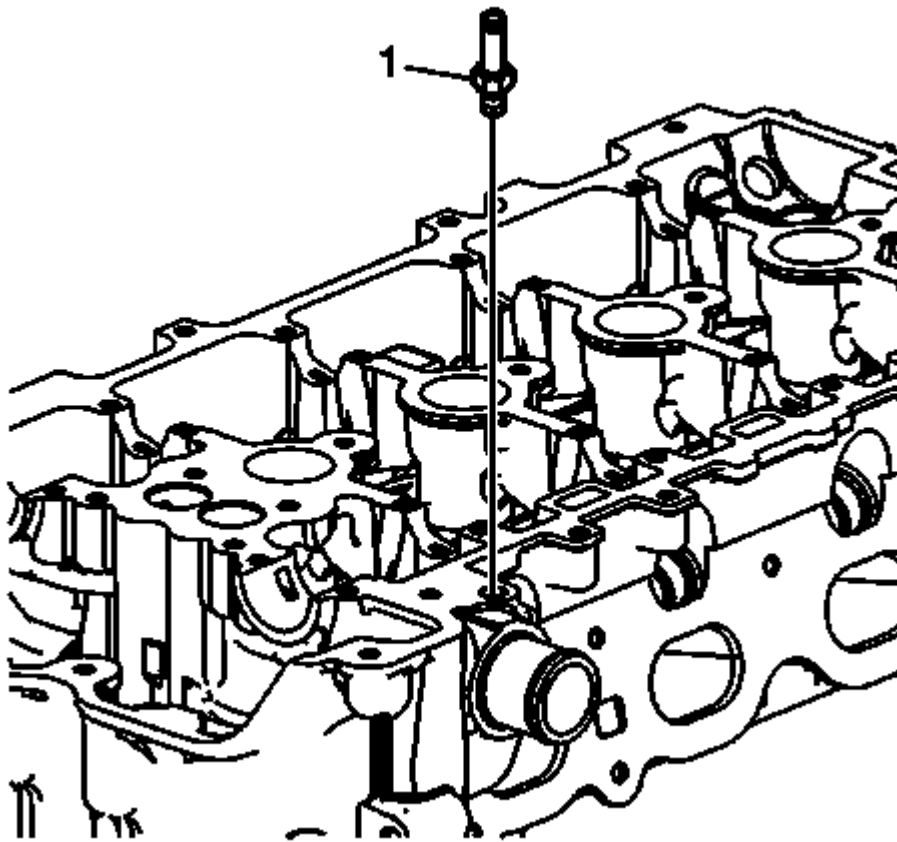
Identifying the Coolant Air Bleed Hose Fitting
